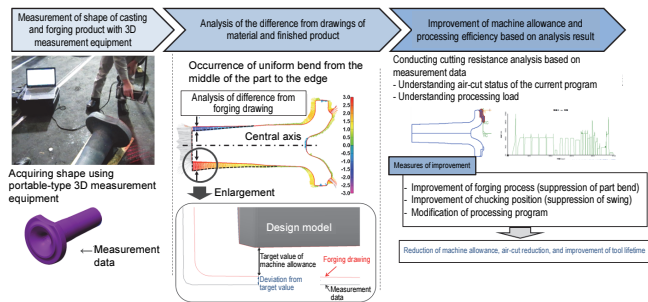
Target of Casting and Forging Material Part Improvement Using 3D Measurement
